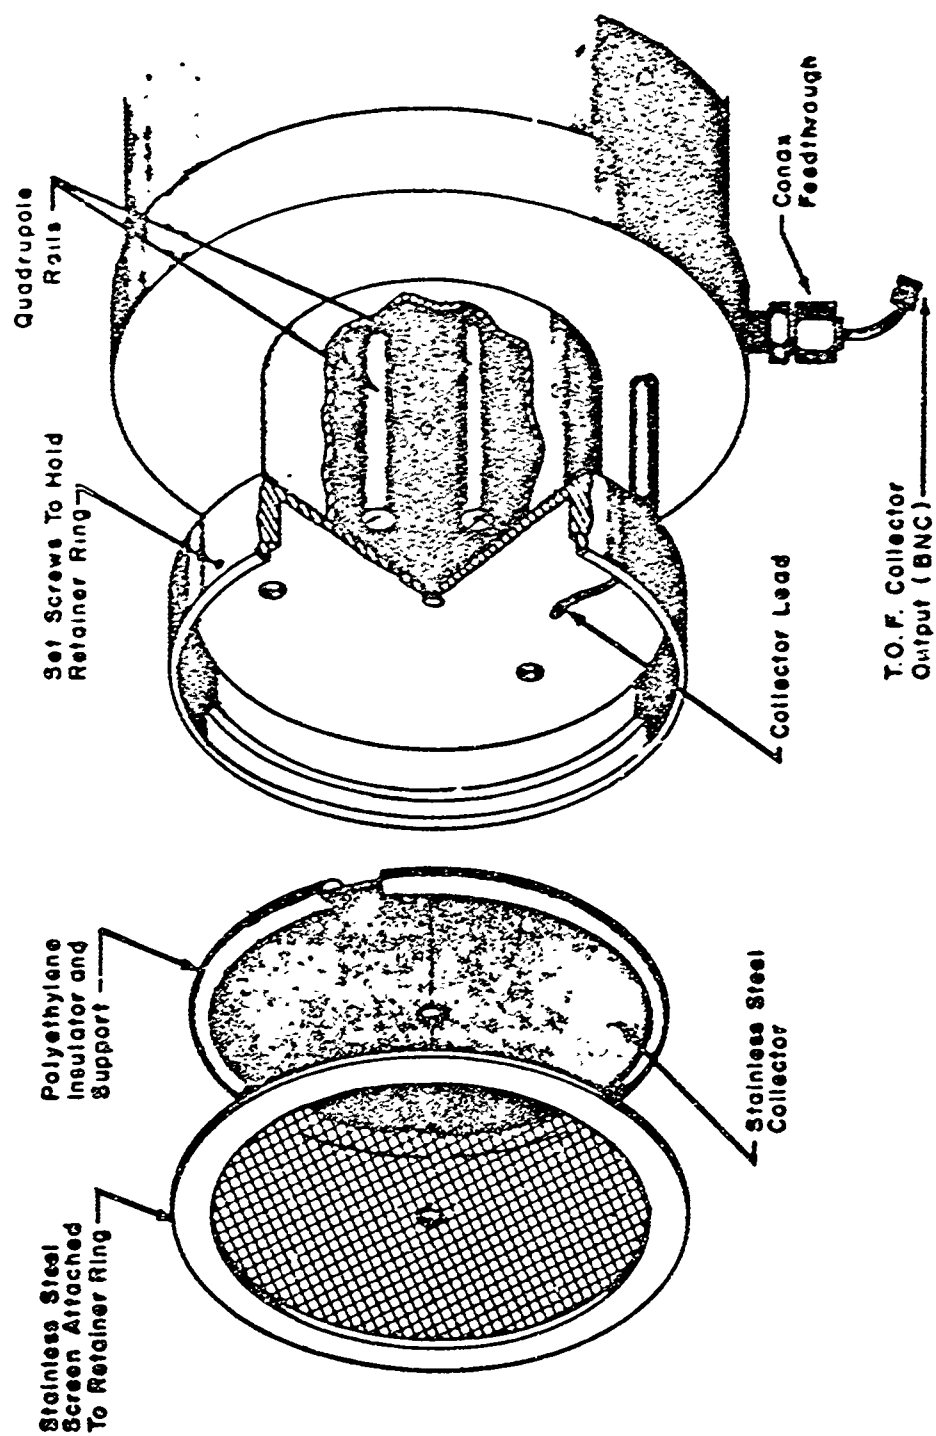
T.O.F. Collector Housing and Quadrupole Adapter
